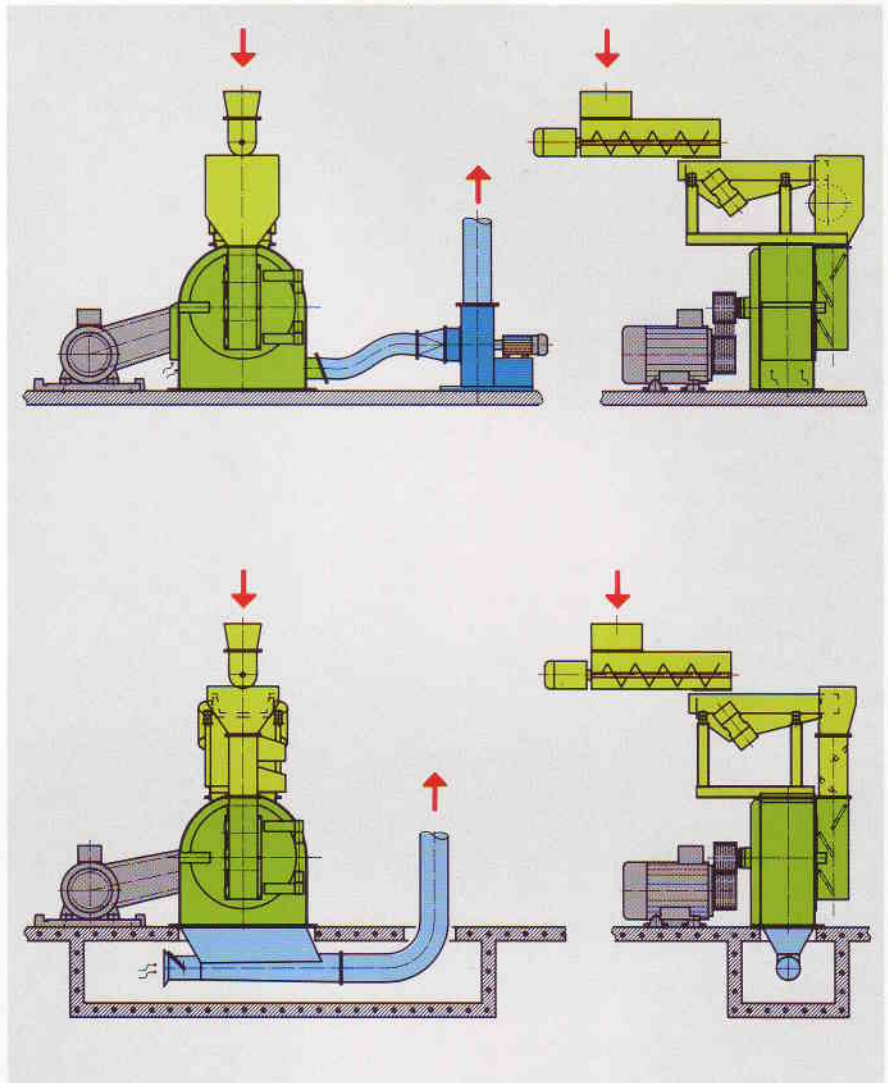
PSKM standard version, equipped with wide grinding track, discharge straight downward
